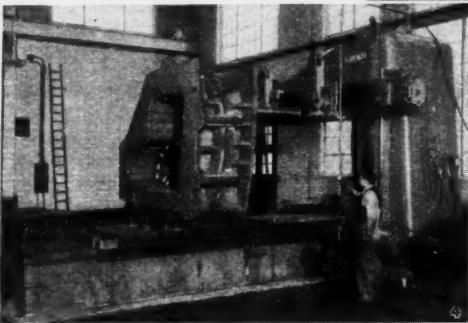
Machining a die-ring for a coupe body panel. Work up to 78 x 144 in. can be handled on this machine. Fig. 5—Battery of radial drilling machines.
